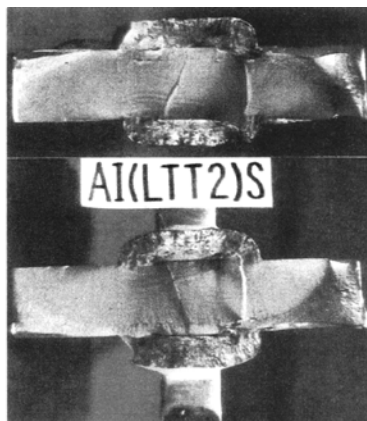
Fracture surface after fatigue test (Type AI,  $150 \text{ N/mm}^2$ ,  $5.02 \times 10^5$  cycles)
